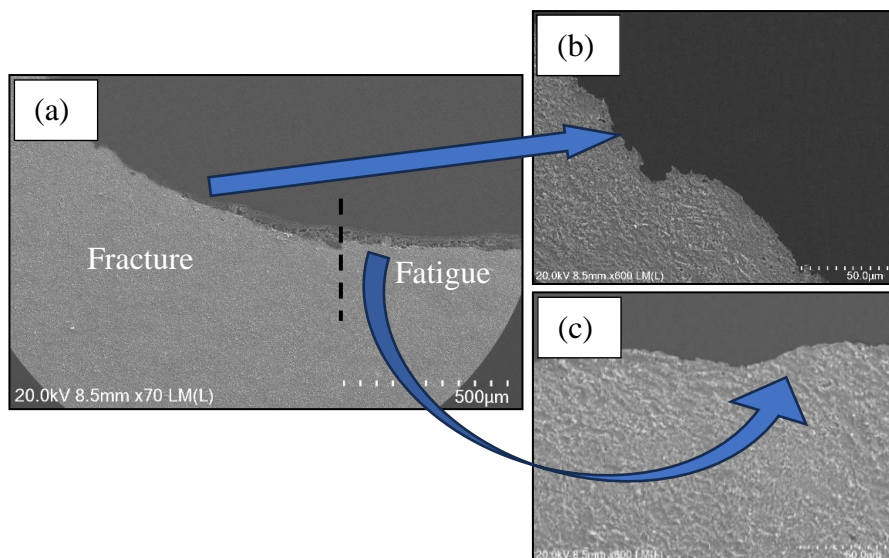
SEM image shows (a) the complete crack path, (b) the crack path in fracture and (c) the crack path in fatigue of specimen FT-7.
